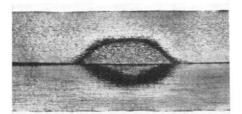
Spot weld, showing inadequate fusion.
